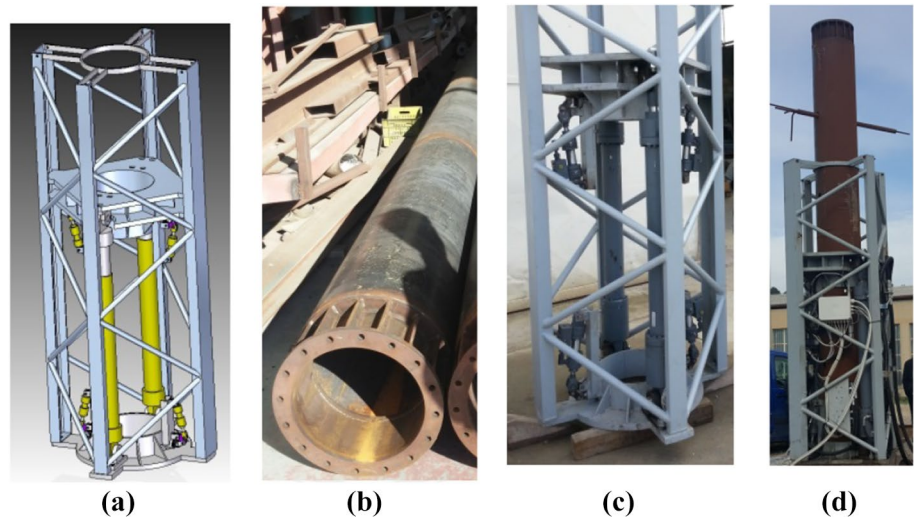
Inner sleeves: a 3D drawing, b photo
